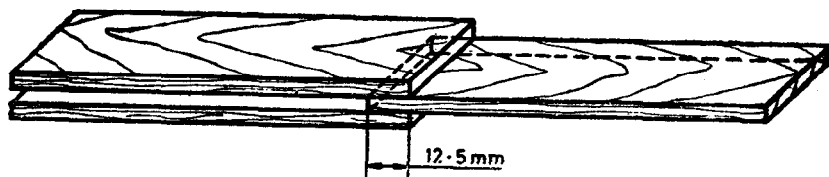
TEST SPECIMEN WITH A DOUBLE LAP JOINT
